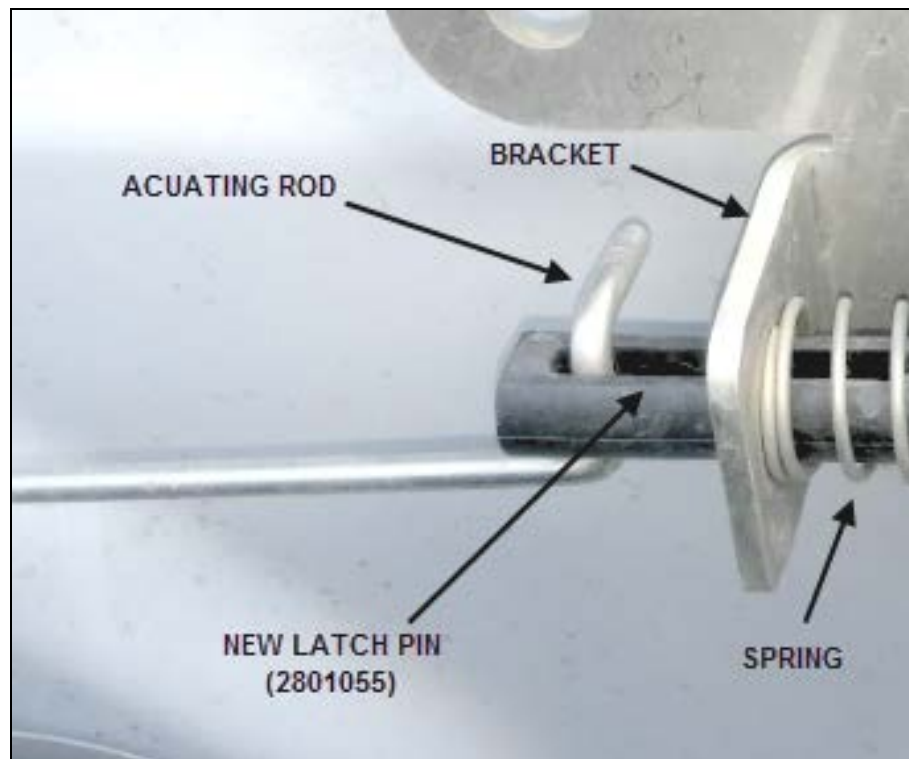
NEW LATCH PIN TO BRACKET INSTALLATION
